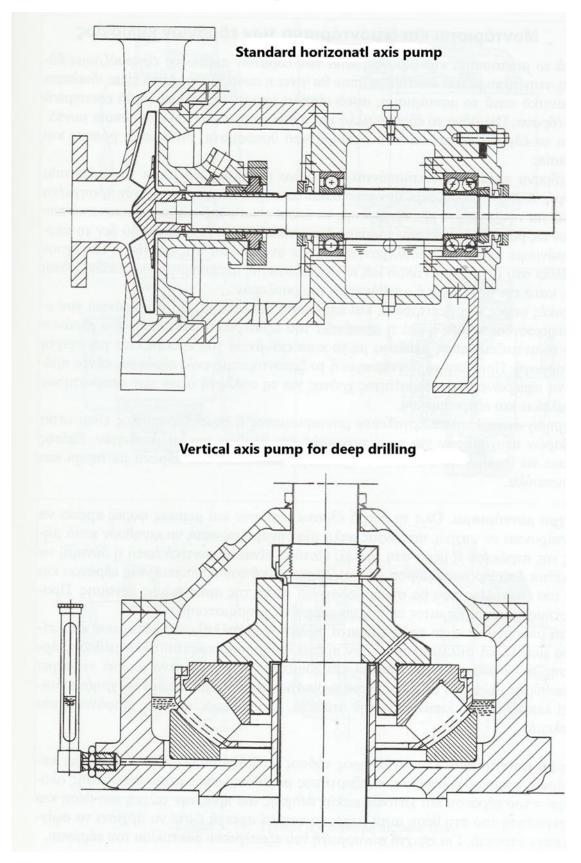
Bearing assembling tolerances with shaft and hull
